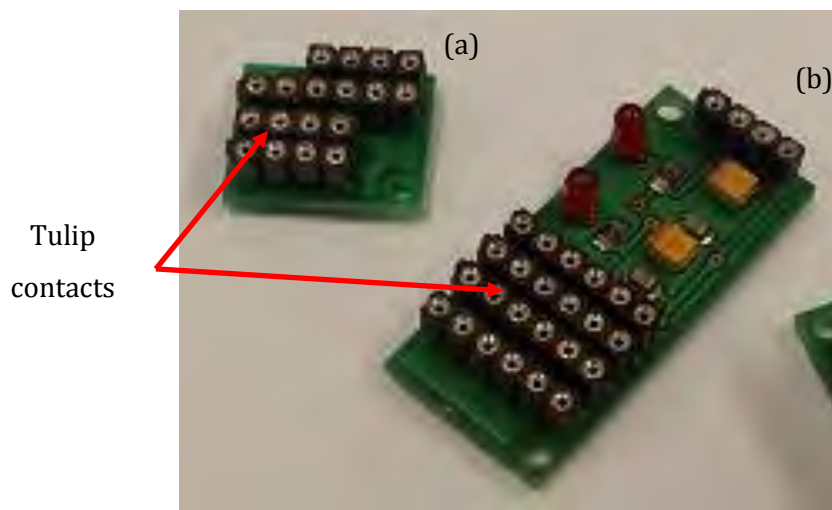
A picture of a (a) Face Power PCB and a (b) Power PCB, showing sets of tulip connects for power distribution.
